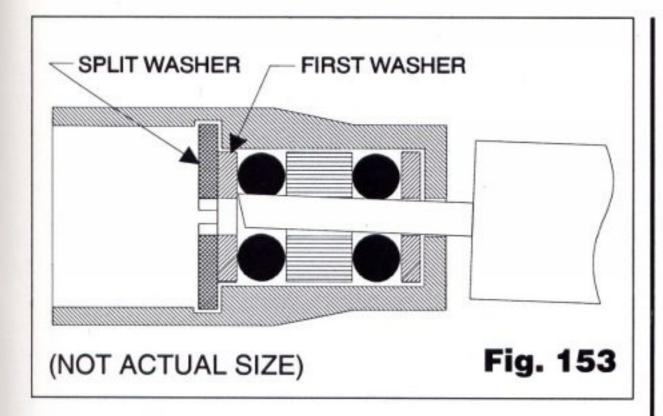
shows a cutaway of the bottom portion of the shock showing how all of the parts fit into the shock seal cavity. Fig. 153 is the same cutaway drawing which depicts the shock assembly tool being used to remove the shock seal parts.
